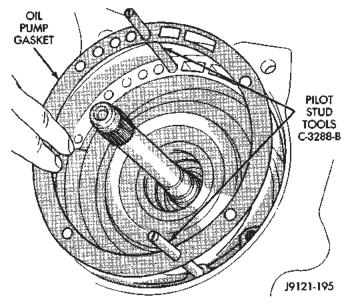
Installing Pilot Studs And Oil Pump Gasket
